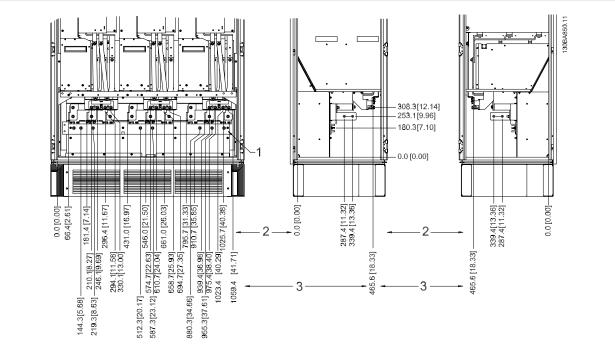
Terminal locations - Inverter cabinet - F2 and F4 (front, left and right side view). The connector plate is 1.65 in [42 mm] below .
